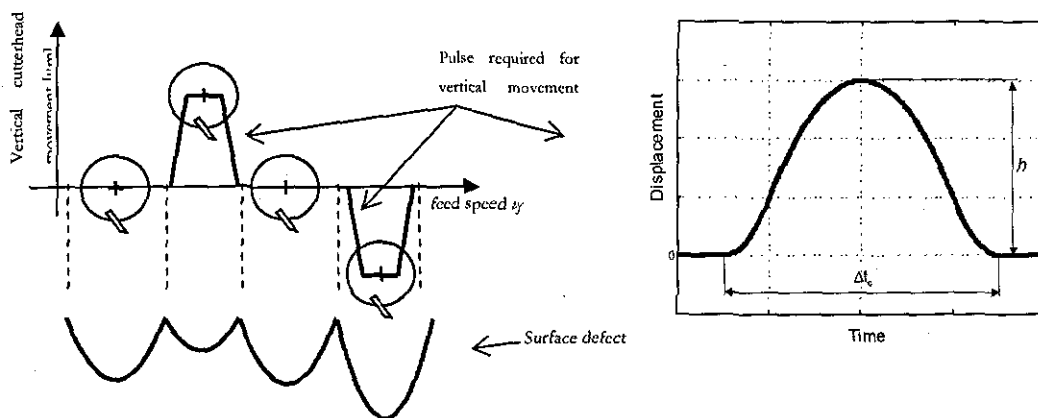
Vertical cutterhead movement to produce surface defects
